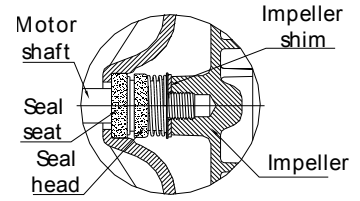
A-Mechanical seal replacing 5PXE2A through 5PXE5A
